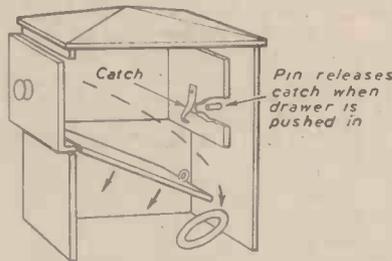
Shows the simple construction of one form of trick drawer used for disposal of ring.
